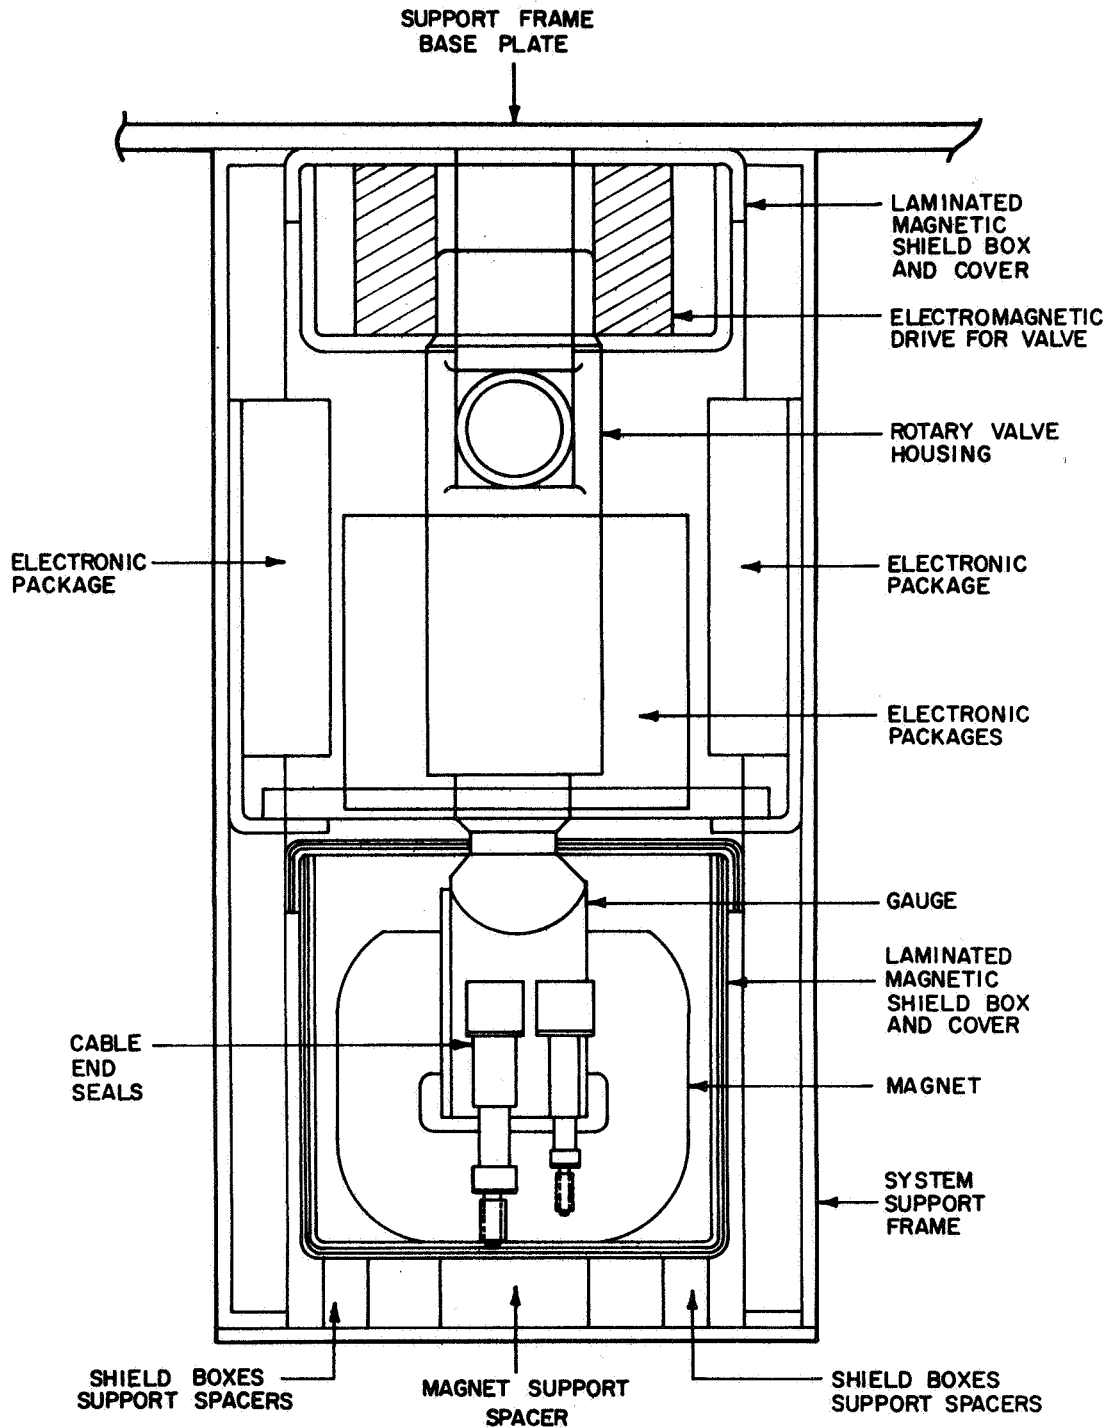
Side view of rotary valve and flexure-pivot valve version of yaw attitude sensor package.
